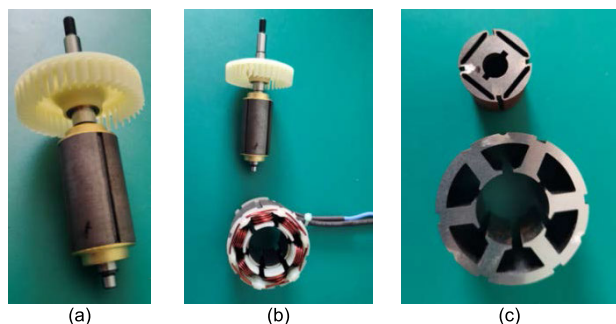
Prototype. (a) Rotor. (b) Rotor and winding. (c) Stator and rotor.
